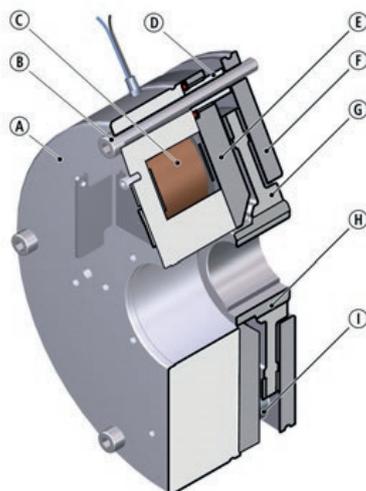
Layout of an INTORQ BFK464-R spring-applied brake Complete stator + rotor + flange
